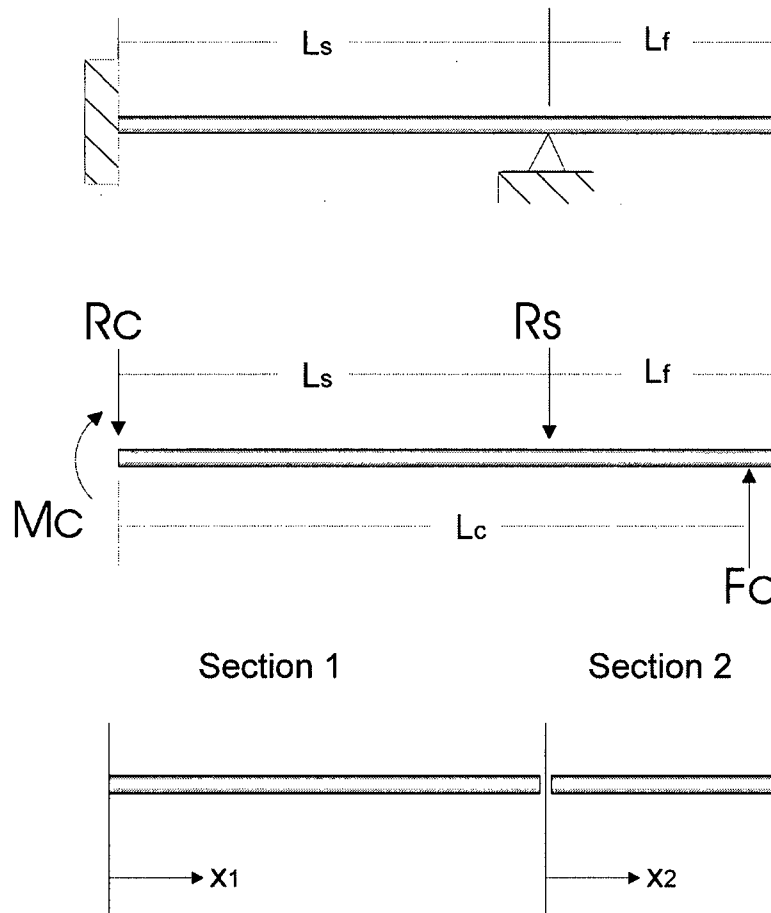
bc. Tool Model: cantilevered at the tool chuck and pin supported at the tool attachment bearing.
